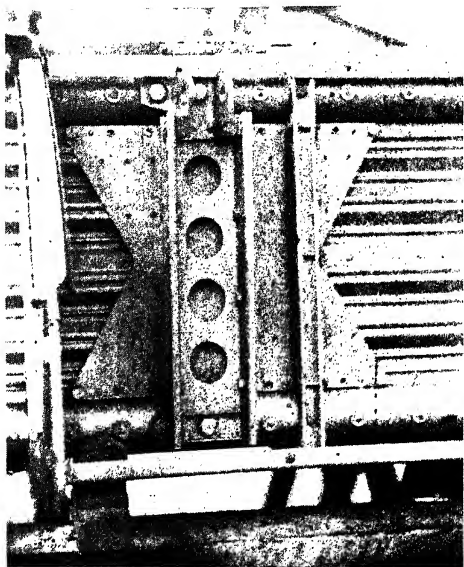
THE POINT OF ATTACHMENT TO THE FRONT SPAR FACE.
